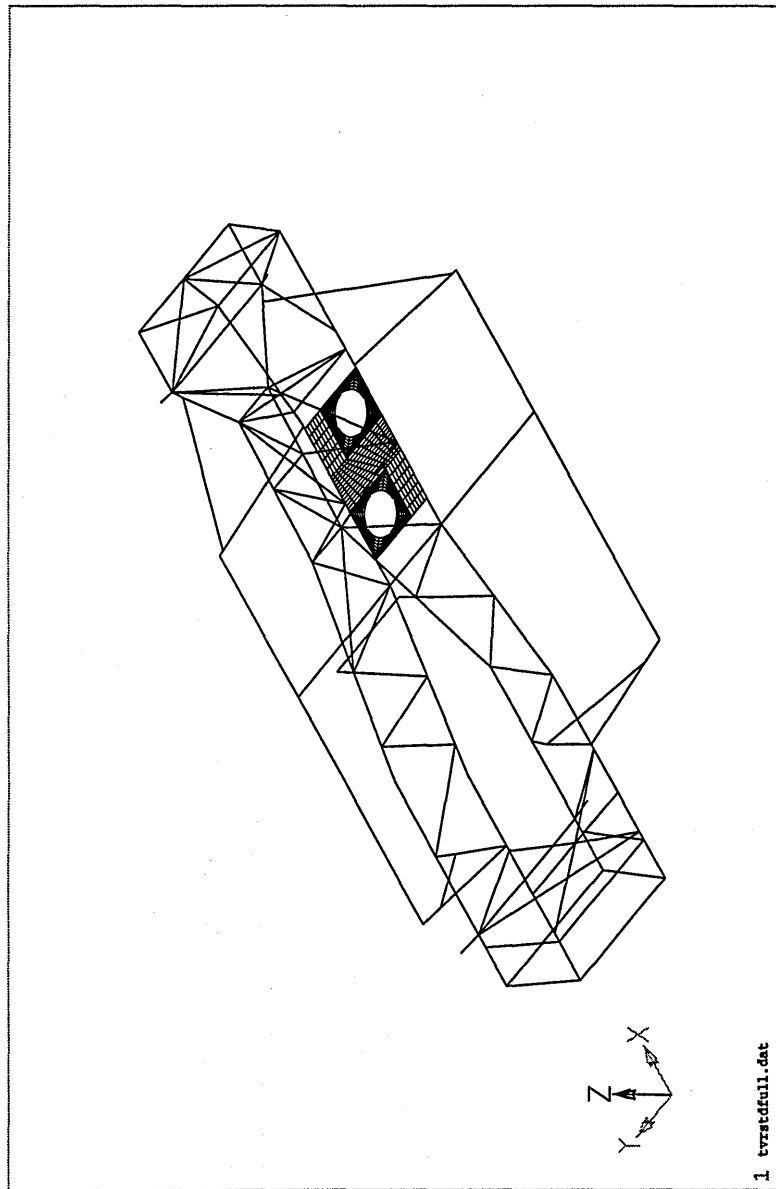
Chimaera Chassis with the gearbox crossmember and the plate
